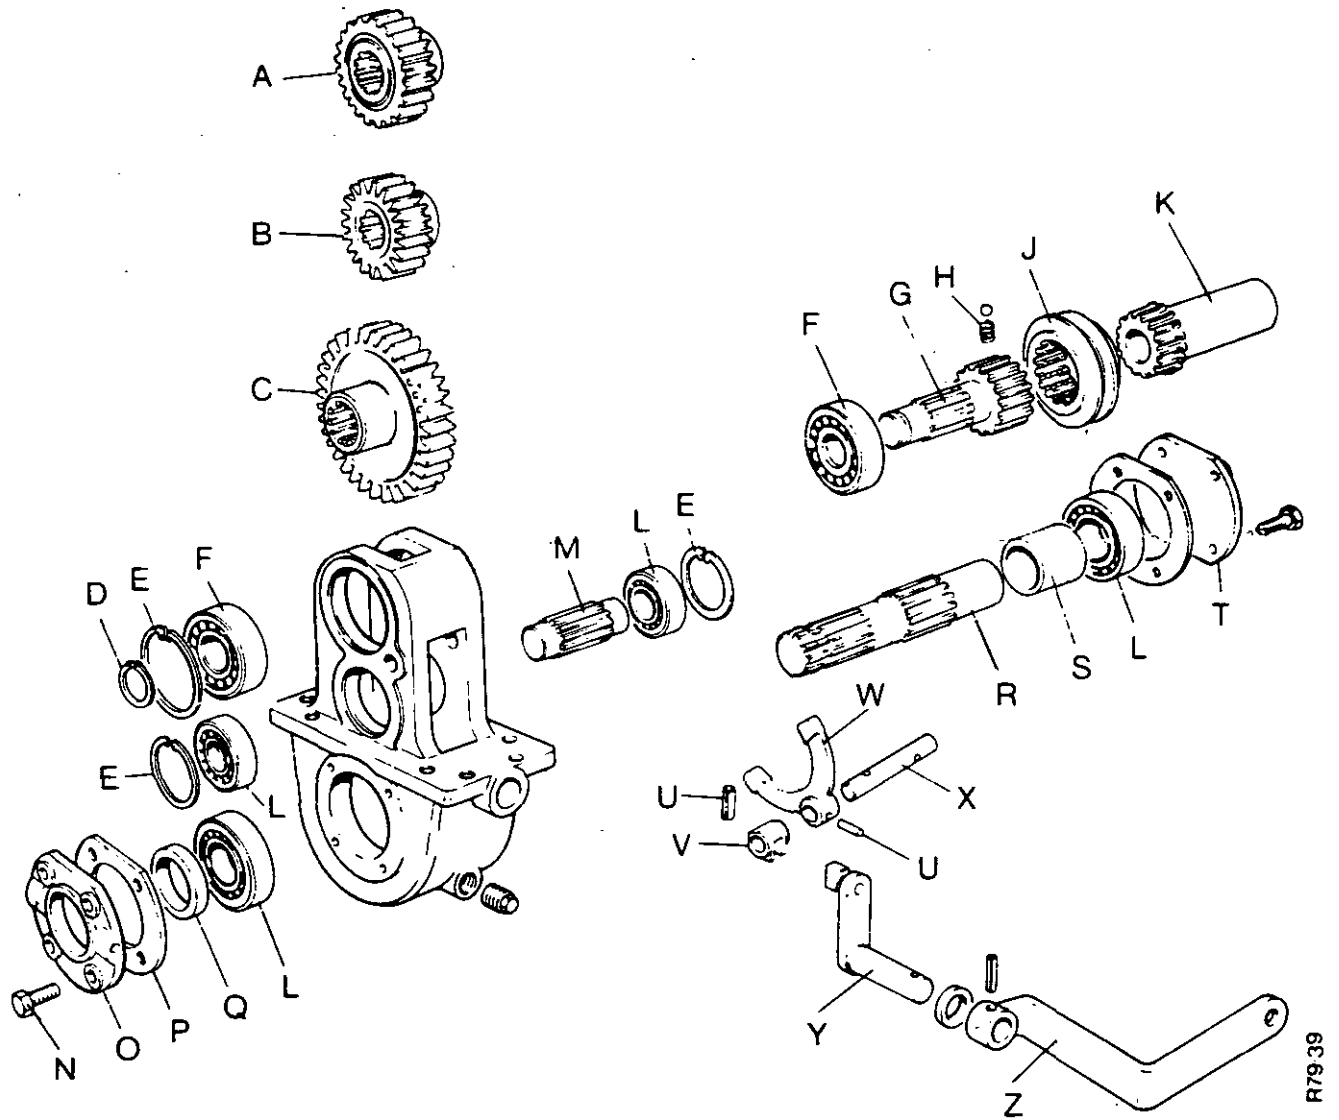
TRANSFER GEARBOX DISASSEMBLED
